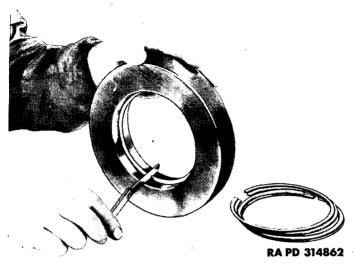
Measuring Piston Ring Gap Using Gage 41-G-400 and Ring 41-R-2492
